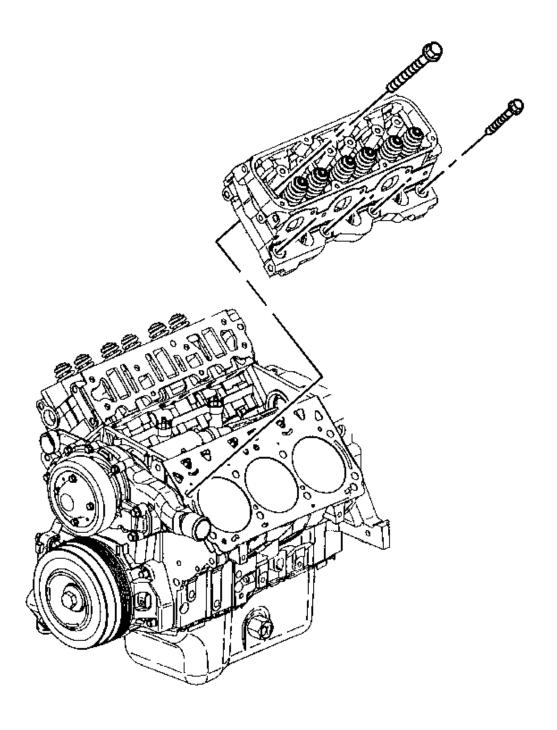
Left Cylinder Head Gasket Courtesy of GENERAL MOTORS CORP.
